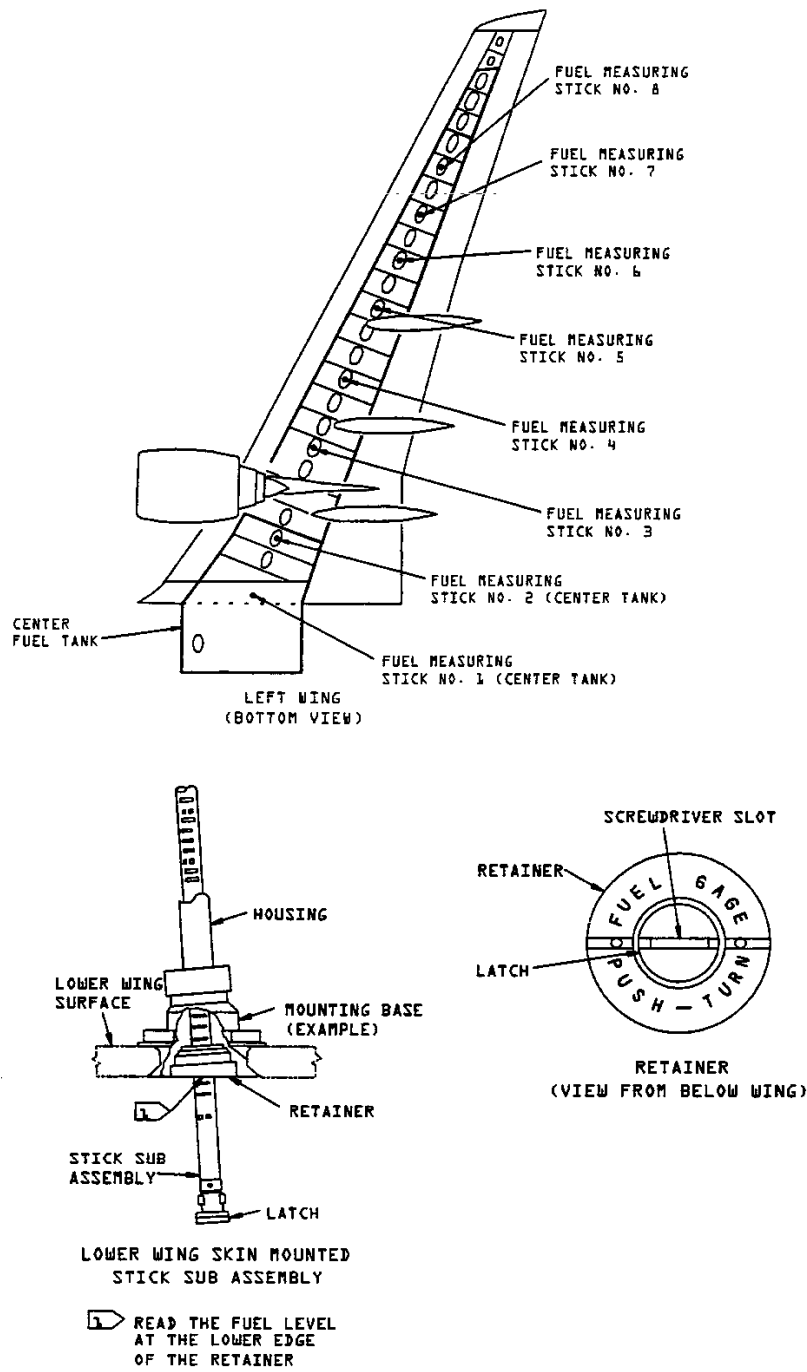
B-737-800 Fuel Measuring Stick Assembly
